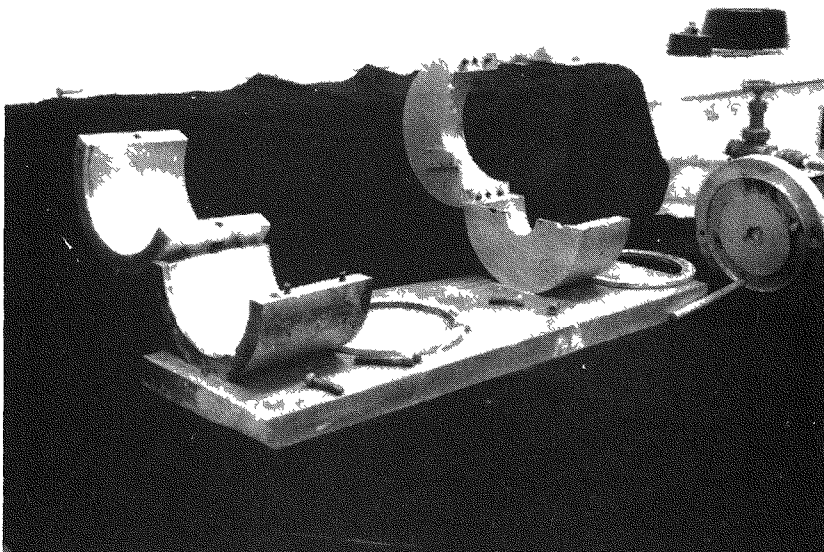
Aluminum Mold for Ceramic Hearth Casting (Disassembled)
